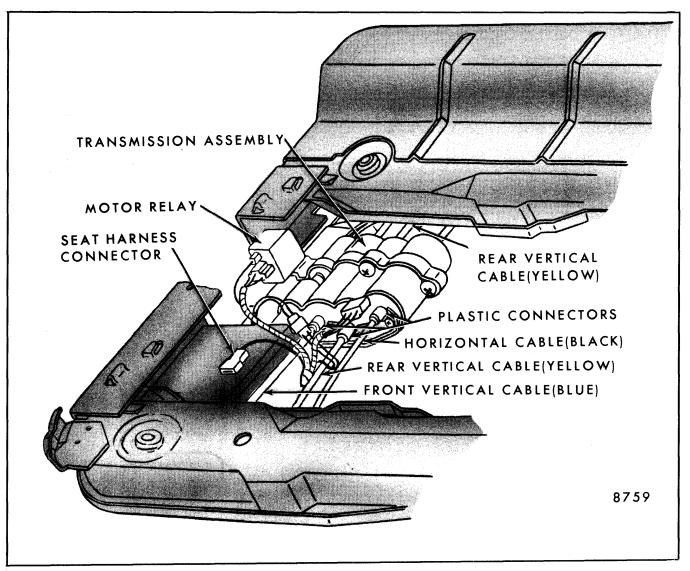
Driver's Six-Way Seat Transmission, Drive Cables and Wire Harness
